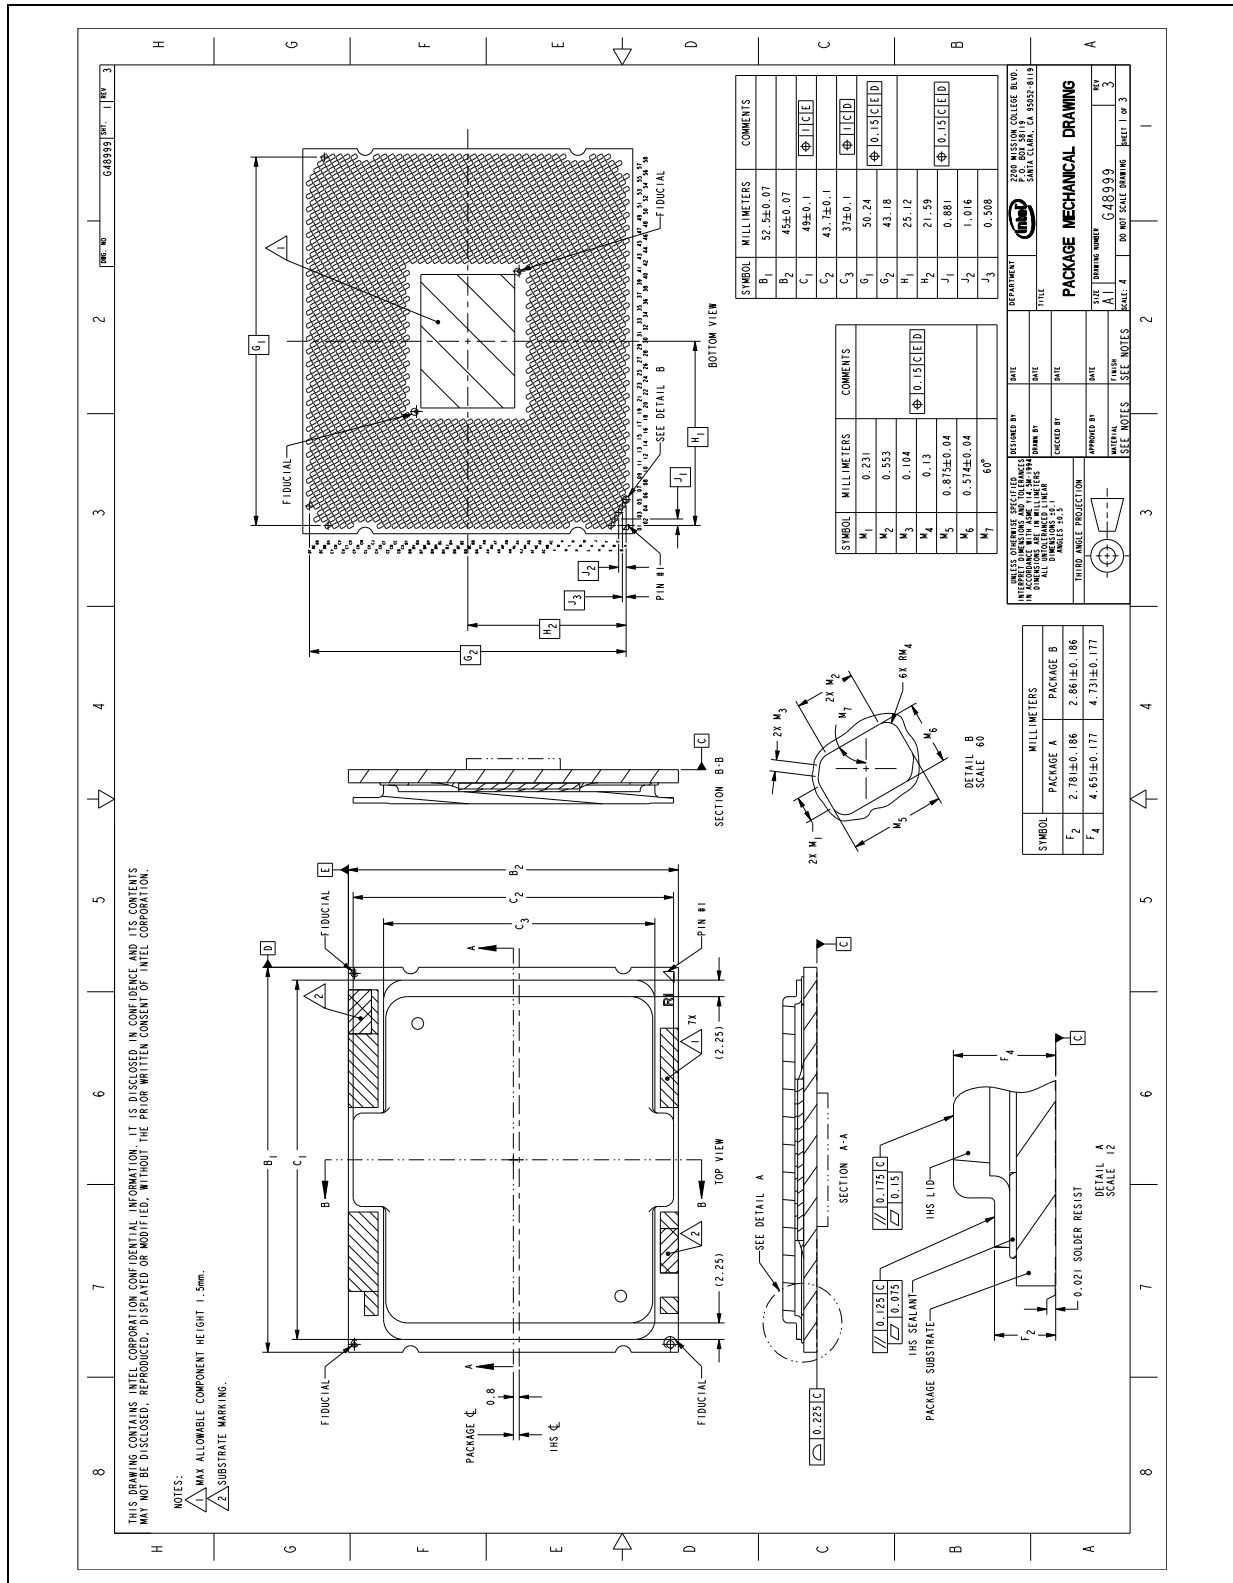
Processor Package Mechanical Drawing (Sheet 2 of 3)
